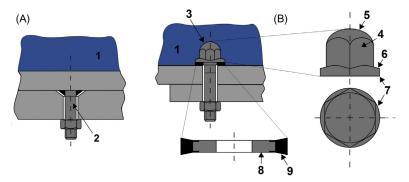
(A) To prevent crevices at the product side (1), screws, pins, or a stud welded on the nonproduct side (2) should be used. (B) A bolt head (3) that is hexagonal (4), domed (5) and provided with a sloped circular collar (6, 7) is easily cleanable, and the metal-backed (8) elastomer gasket (9) is used to seal the thread (Lelieveld et al., 2003; Hauser et al., 2004b).
